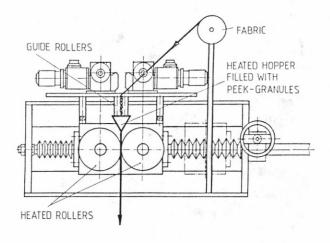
Rolling Mill for Manufacturing of PEEK Prepreg
